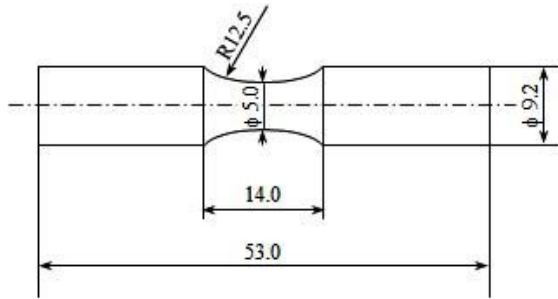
The shape of fatigue test specimen (dimension in mm).
